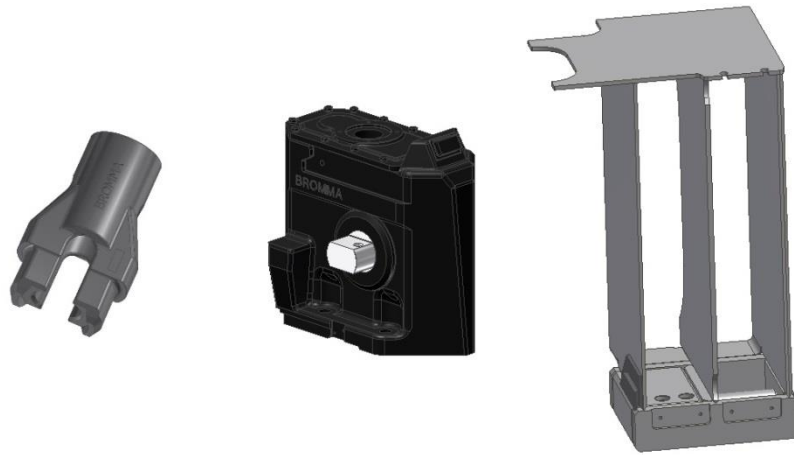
The three selected spreader components: Guide block, gearbox housing and center web plate substructure
